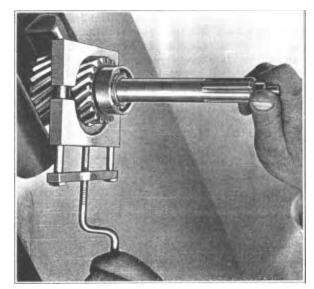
Installing Mainshaft Intermediate Gear Thrust Washer Retainer— J-448-5 Snap Ring Installing Tool
